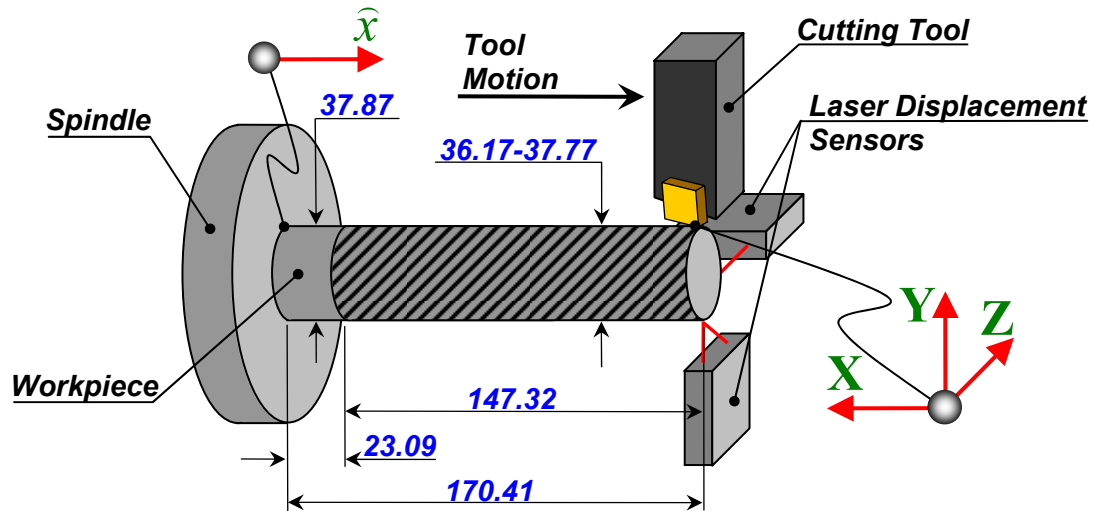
A schematic of the experimental setup for measuring the workpiece displacement during machining annotated with the actual machined dimensions of the workpiece (in mm).
